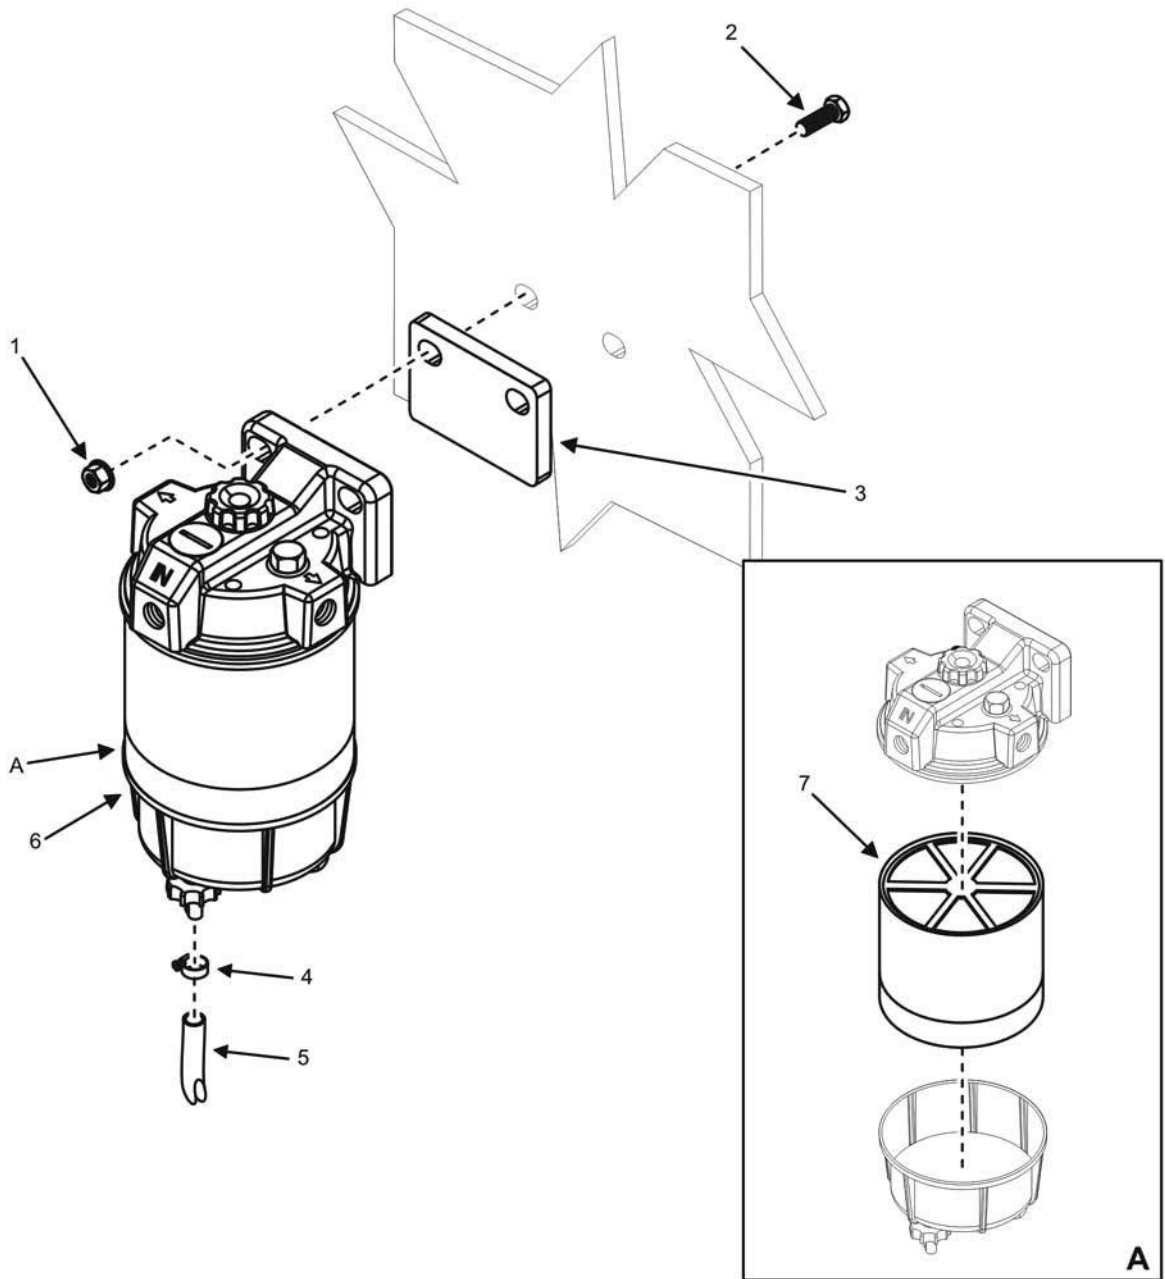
Fuel Filter/Water Separator Assembly (Sheet 1 of 3).
